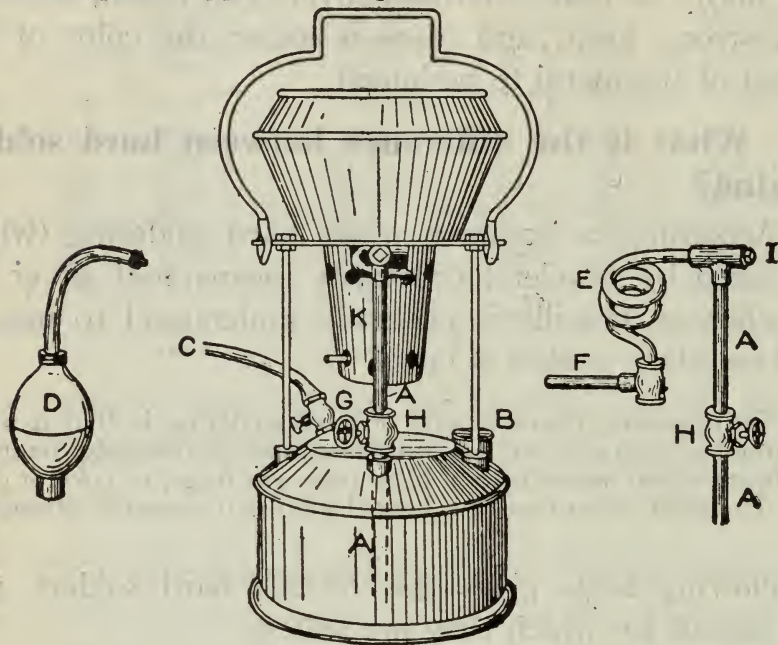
,424.—Plumber's gasoline furnace, adapted to heating soldering pots and copper bolts.
